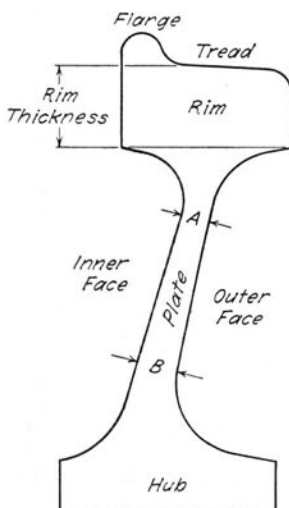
CROSS-SECTION OF WHEEL (VARIOUS PARTS)
